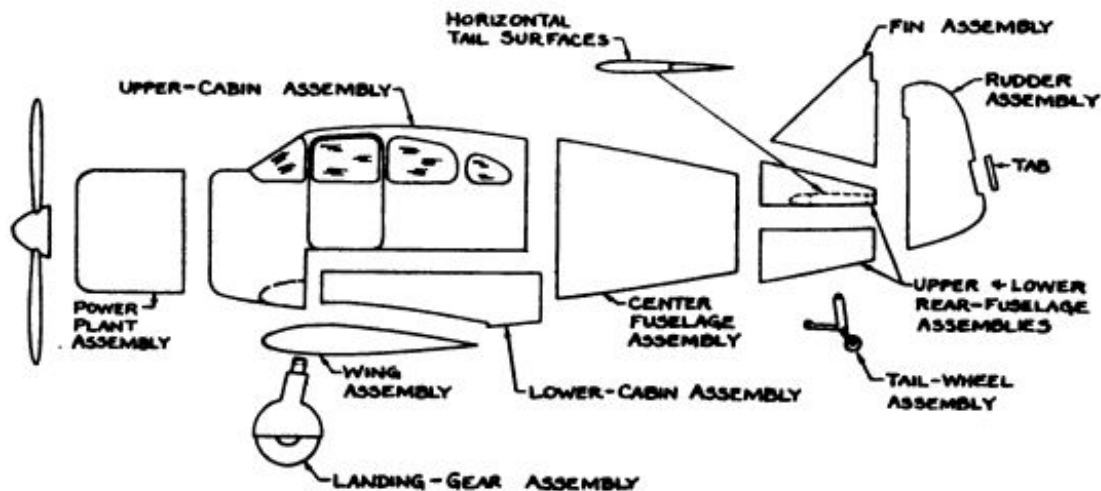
AIRPLANE BREAKDOWN—SIDE ELEVATION
